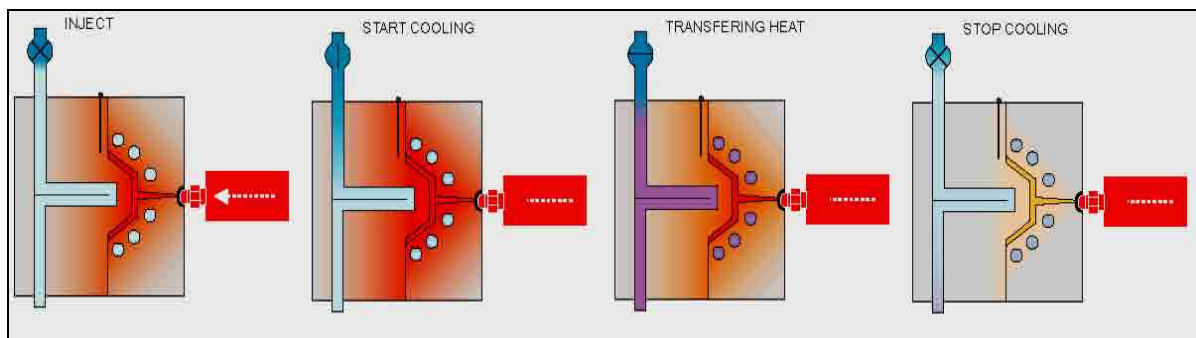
Diagram of the pulse cooling system in the injection mould during the operation of an injection moulding machine [2, 5]
